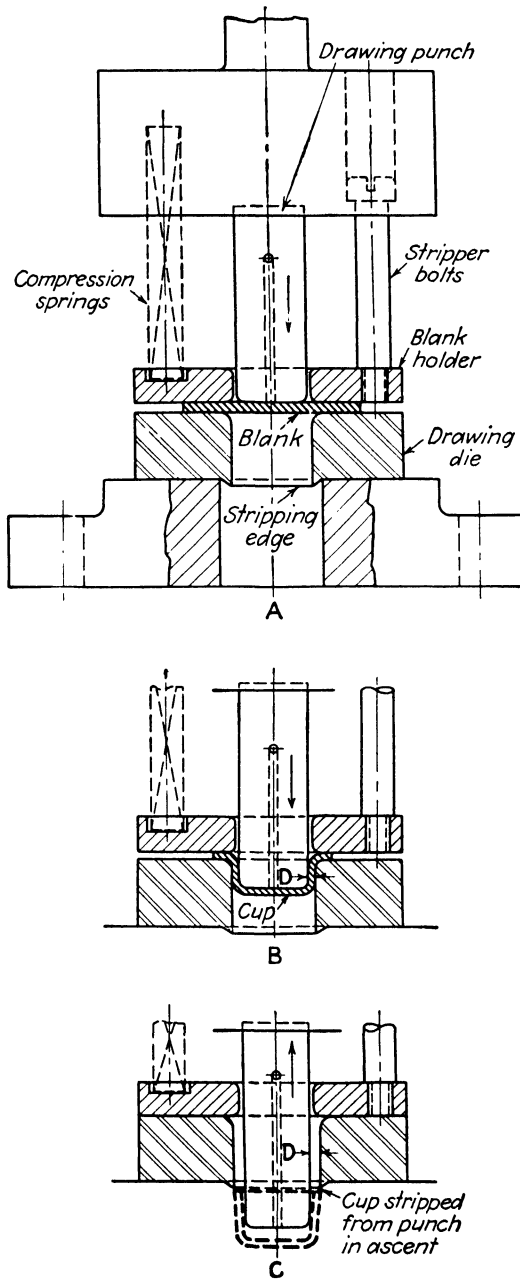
Illustrating the principles involved when cylindrical shells are produced in plain drawing dies.
